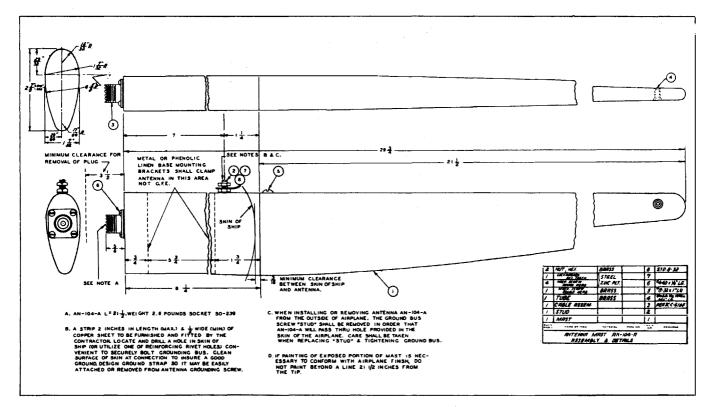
Antenna Mast AN-104-A—Outline Dimensions
